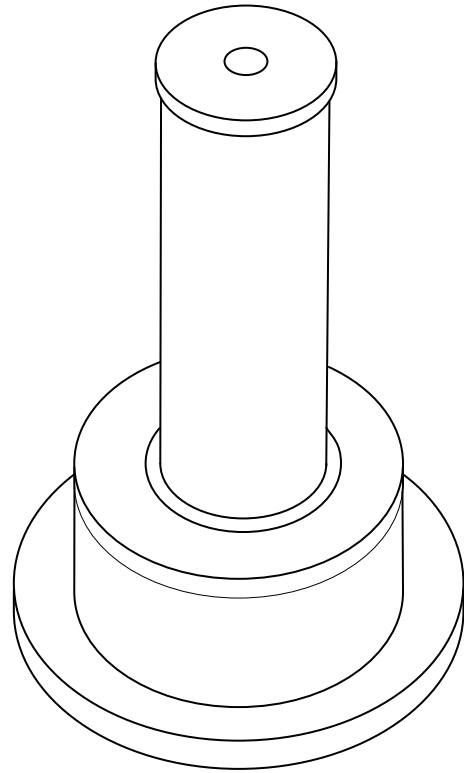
Oil Seal Pressing Tool (332/Y4033)
